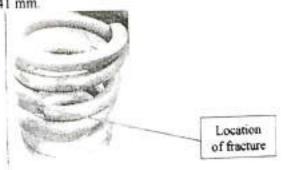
Broken Bolster Helical spring (outer) with stamping particulars.
